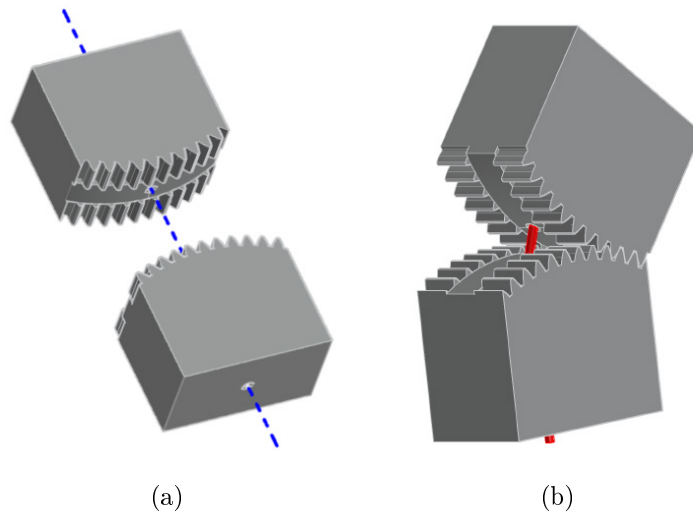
Three dimensional drawing of the toothed contact surfaces. (a) Exploded view of the joint evidencing the toothed profiles and the pitch lines in two adjacent segments (blue dashed line indicates the cable axis); (b) the actual configuration of the joint, with the exposed portion of cable (in red), after a relative rotation of the segments.
